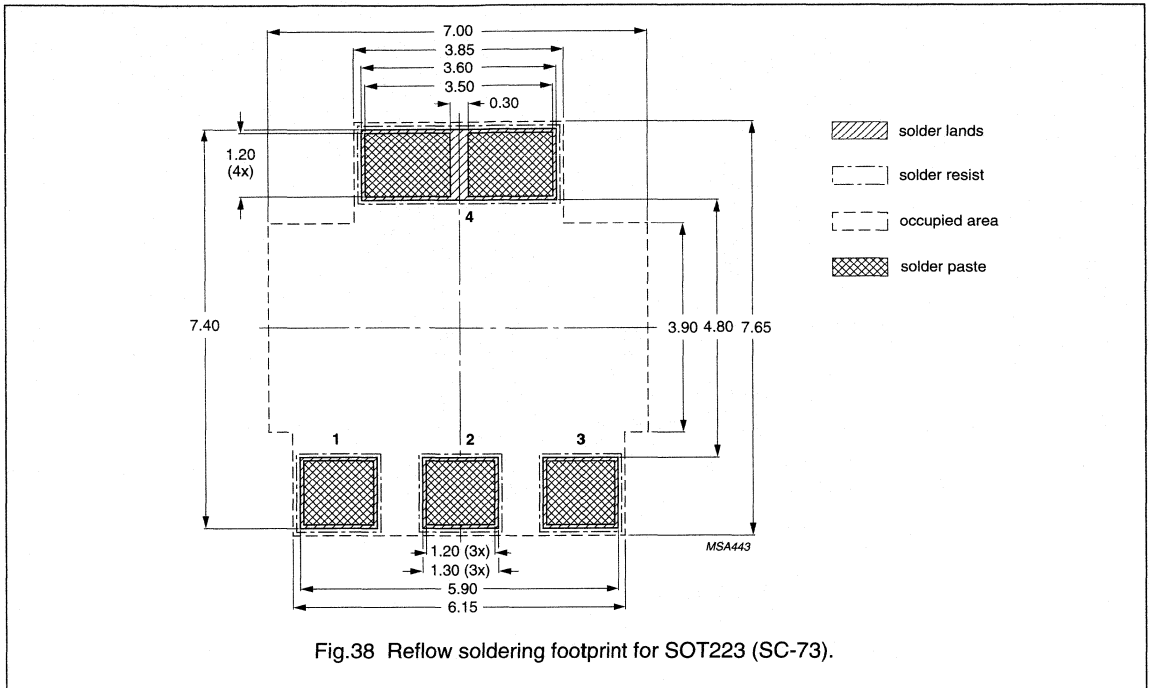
Reflow soldering footprint for SOT223 (SC-73).
